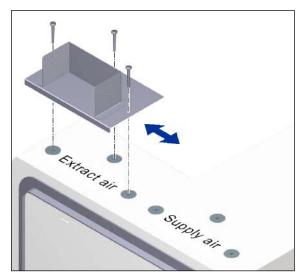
M-WRG-M/MB-FR75/1, fixing the fixing plate for extract air or supply air
